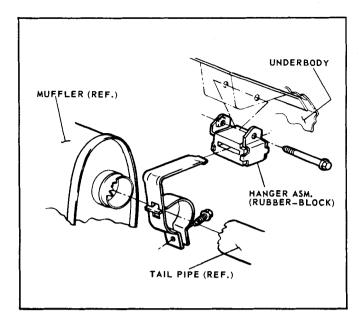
Installation of Rubber Block Exhaust System Hanger (F Series Shown)
